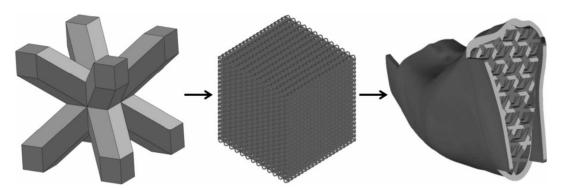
Internal structure. a) Unitary element of the reticular pattern. b) Reticular structure. c) 3D shape filled with the developed pattern.
